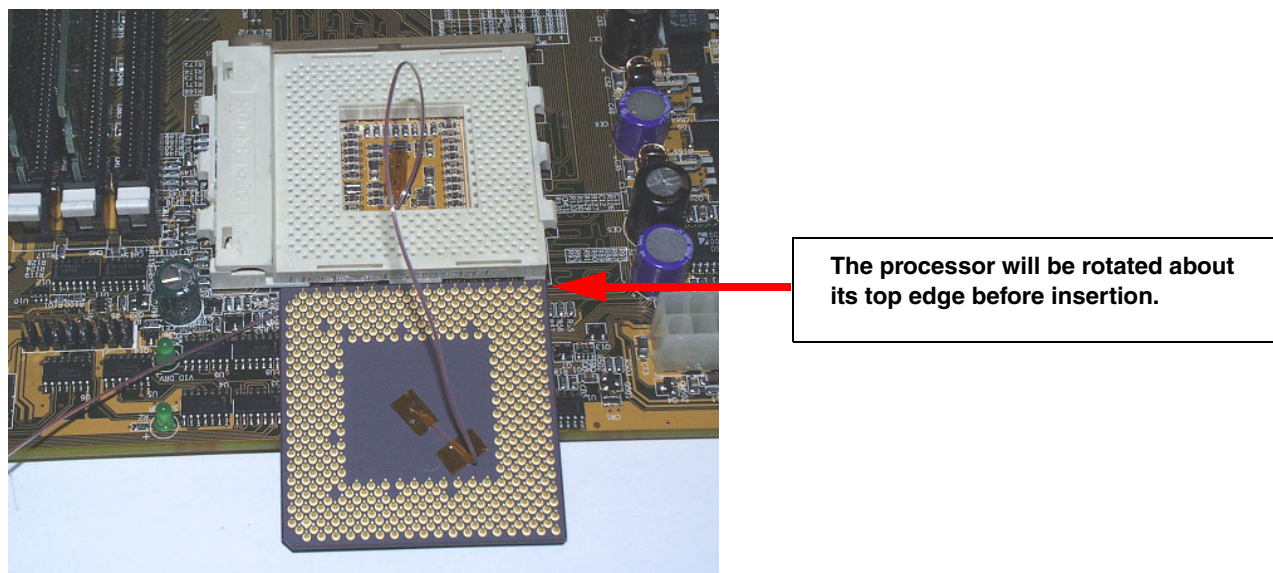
Processor Package and Thermocouple Ready for Insertion into Socket
